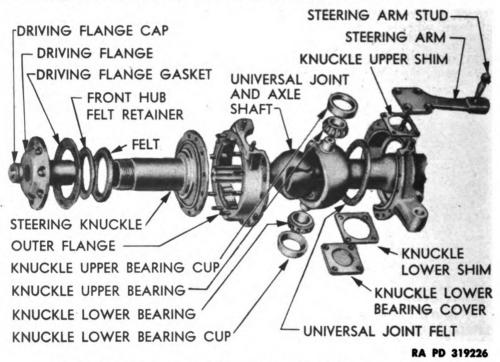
Steering Knuckle and Universal Joint— Left Side Disassembled (6 x 6)
